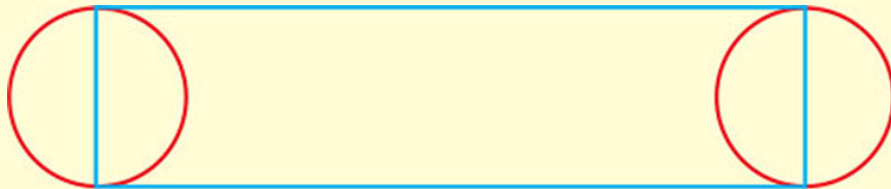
To draw the slot in Cut2D, draw two circles (shown in red) and a rectangle (shown in blue), then join them using the Weld Selected Vectors tool.
